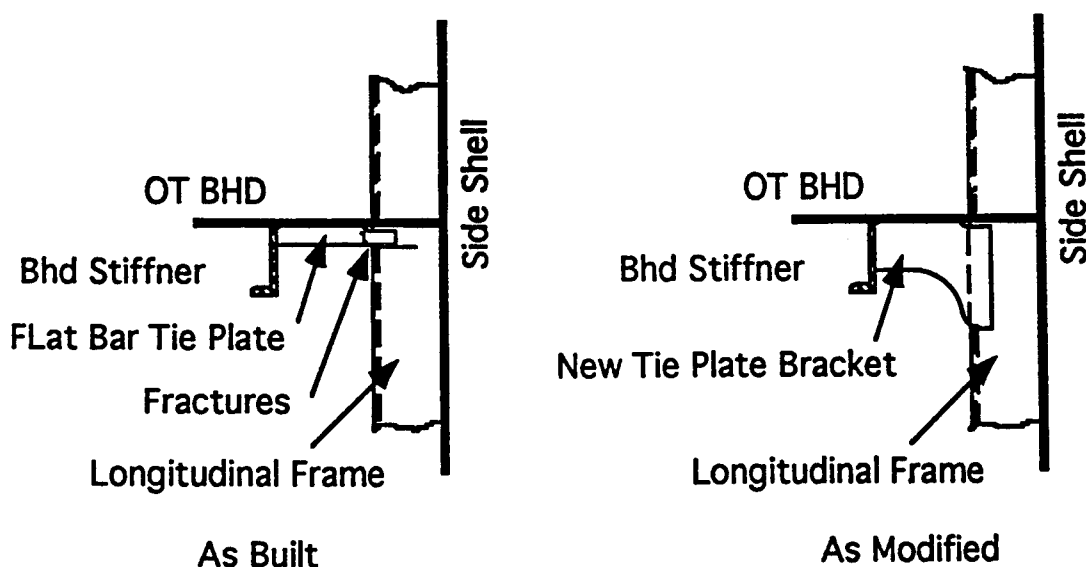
Class B side-shell longitudinal frame intersection with transverse oiltight bulkhead.
